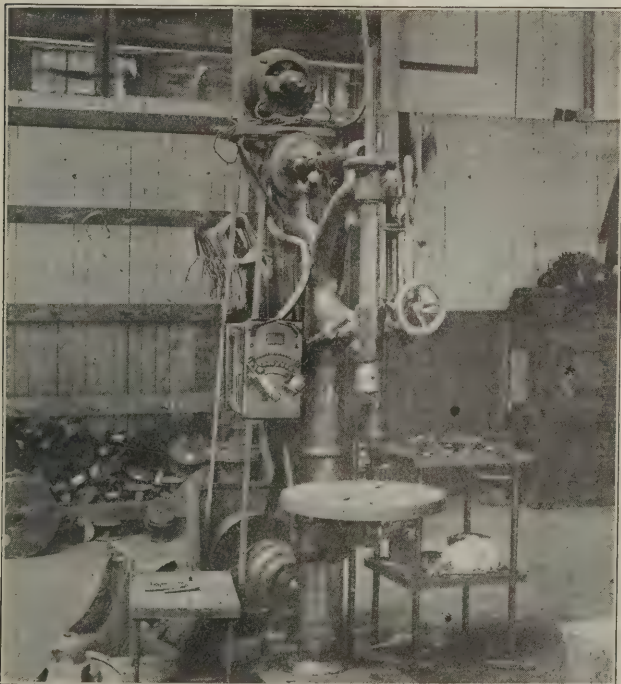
COMBINATION STARTER AND REGULATOR FOR MOTOR-DRIVEN DRILL PRESS.
